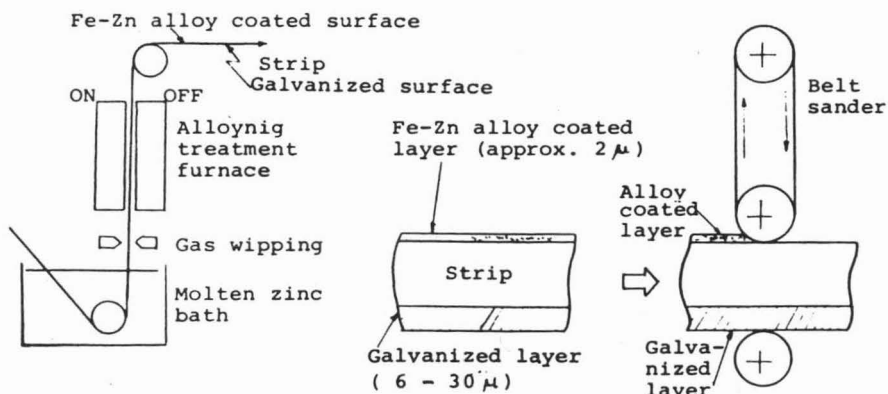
Diagram of one-side galvanized sheet production by the grinding method
